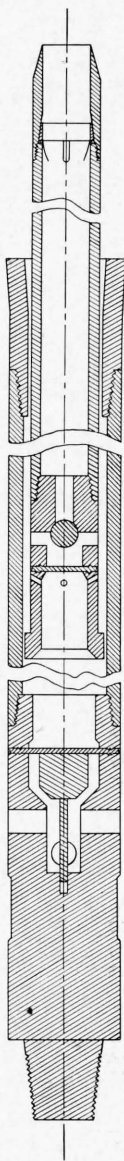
Longitudinal section of a modern cable tool core barrel.
